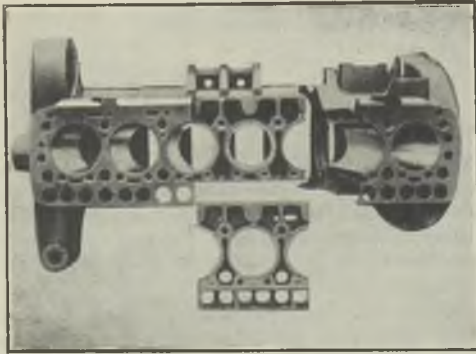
SECTIONS OF THE CASTING SHOWN IN FIG. 2.
